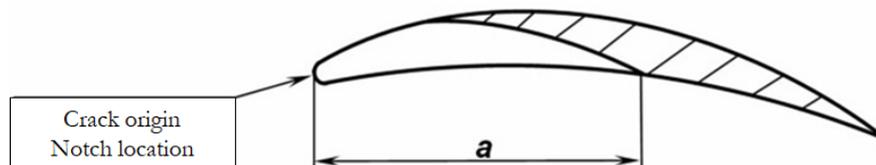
Schematic of cross-section of the blade with definition of crack length
